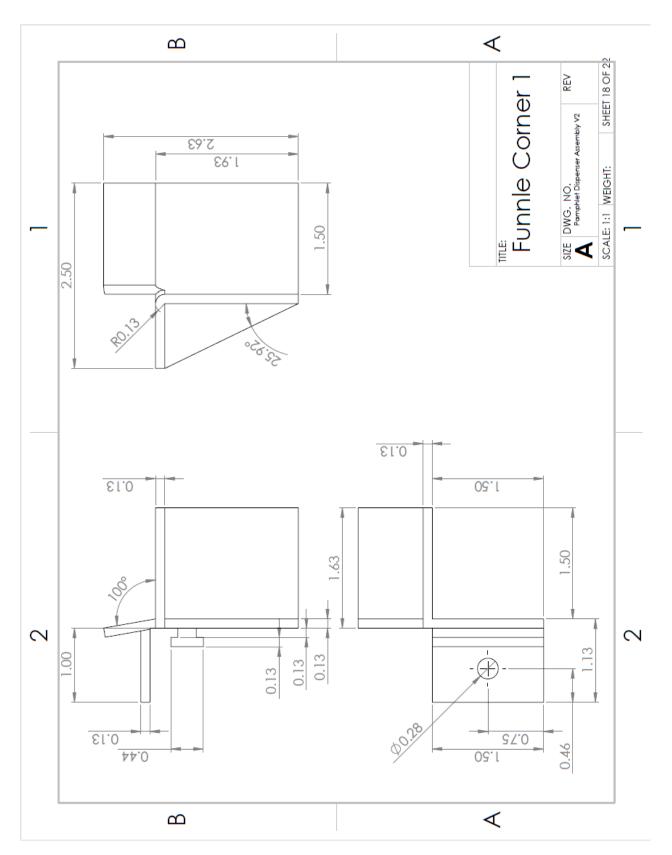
Pamphlet Dispenser Funnel Corner 1 Drawing (not to scale)
